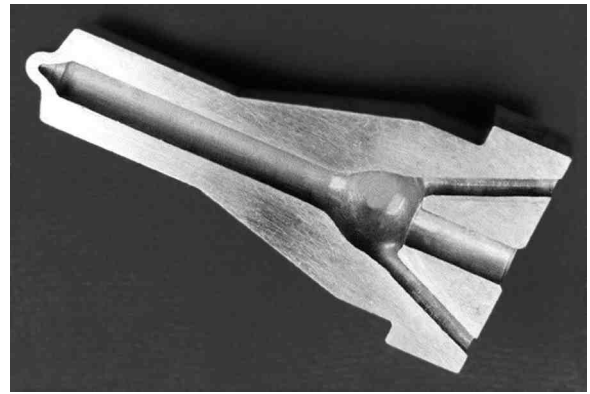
Diesel injector fuel chamber electrolytically machined to a volume requirement.
